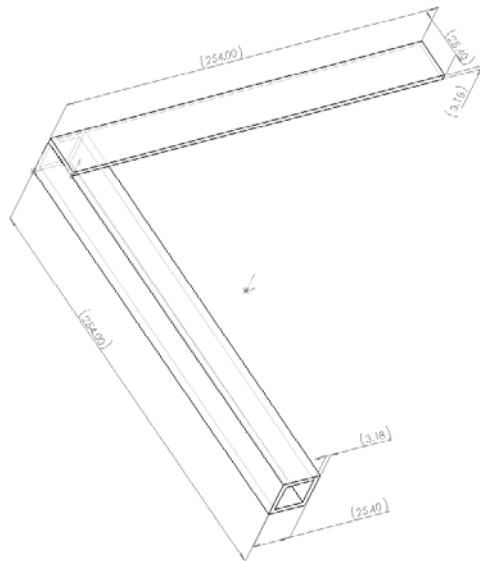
Elbow joint of extruded beams: 3D wire-frame view (mm)
